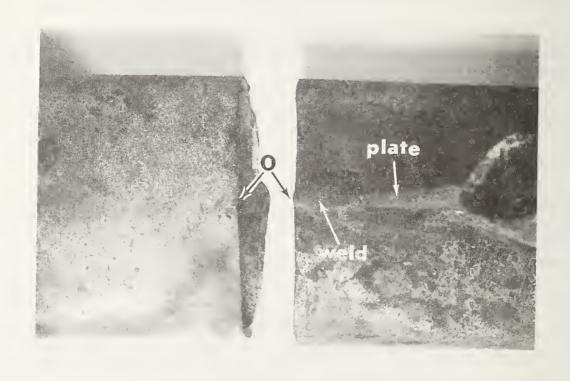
View of fracture origin showing relation to weld for gusset plate. Accident Beechcraft El8S, June 22, 1972.
